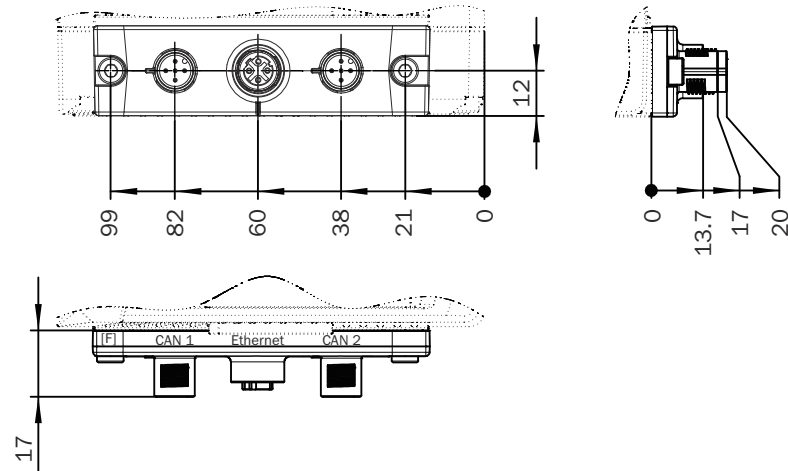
Dimensions of cloning plug F (M12), all dimensions in mm
